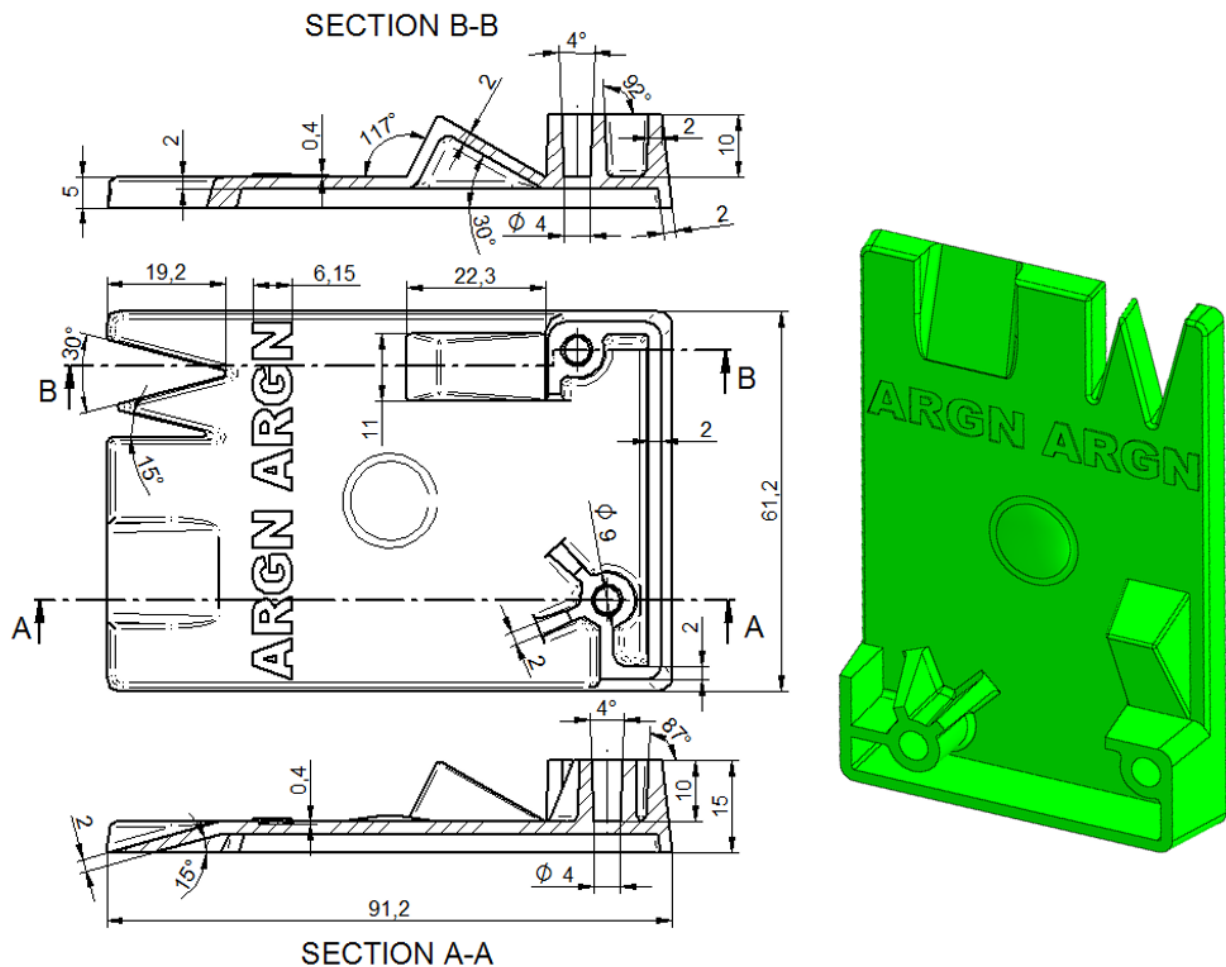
Dimensions and CAD model of the redesigned geometrical part.
